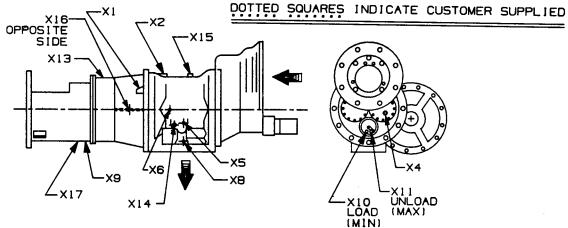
Water Cooled High Stage Gear Driven With Hydraulic Valve Actuator
